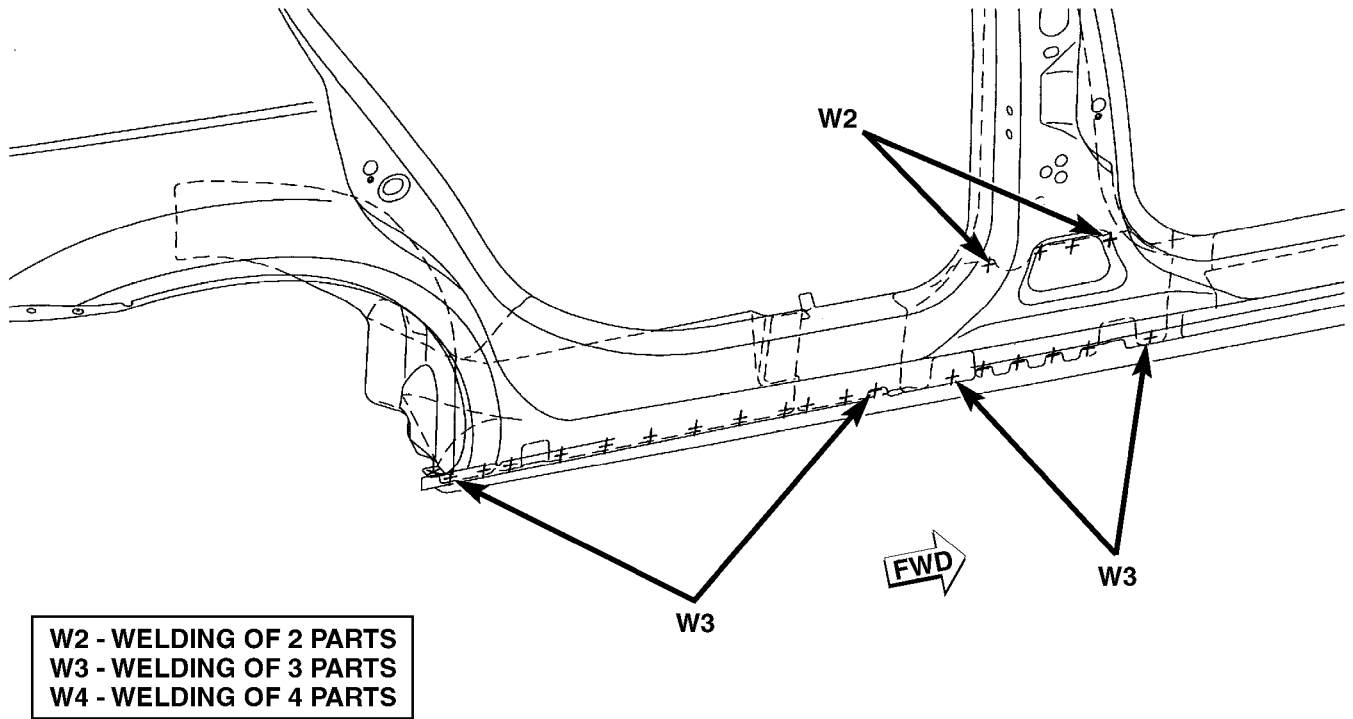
OUTER BODY SIDE APERTURE TO CENTER PILLAR
